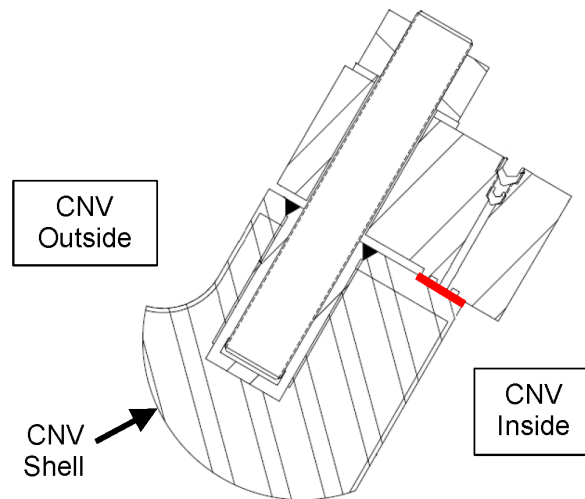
Containment Vessel top head manway (CNV24) flange and cover bolted opening
